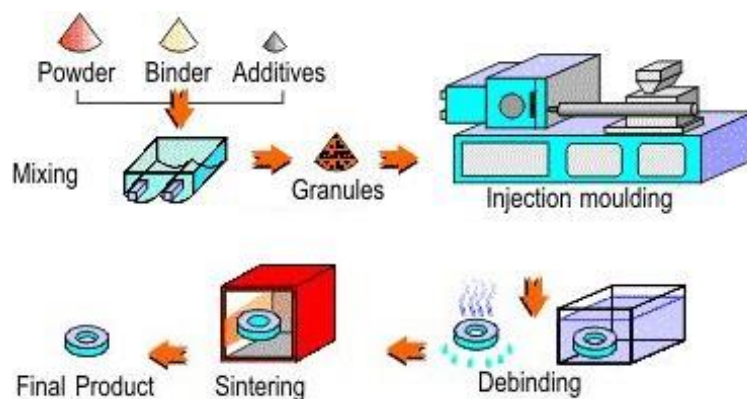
Particular phases of the metal injection moulding technology [14].
